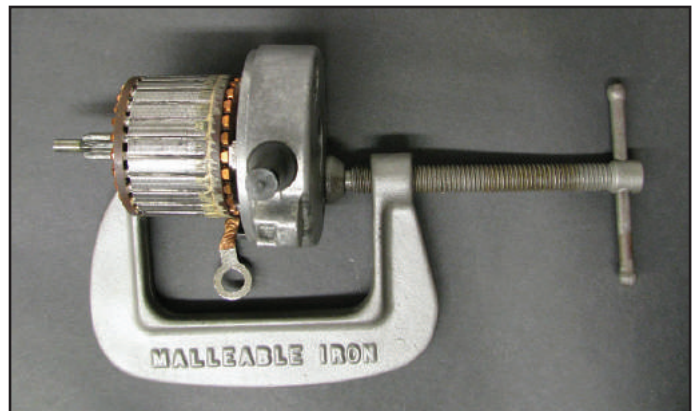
A clamp like this one is the best tool to hold the armature in place while installing the snap ring.
